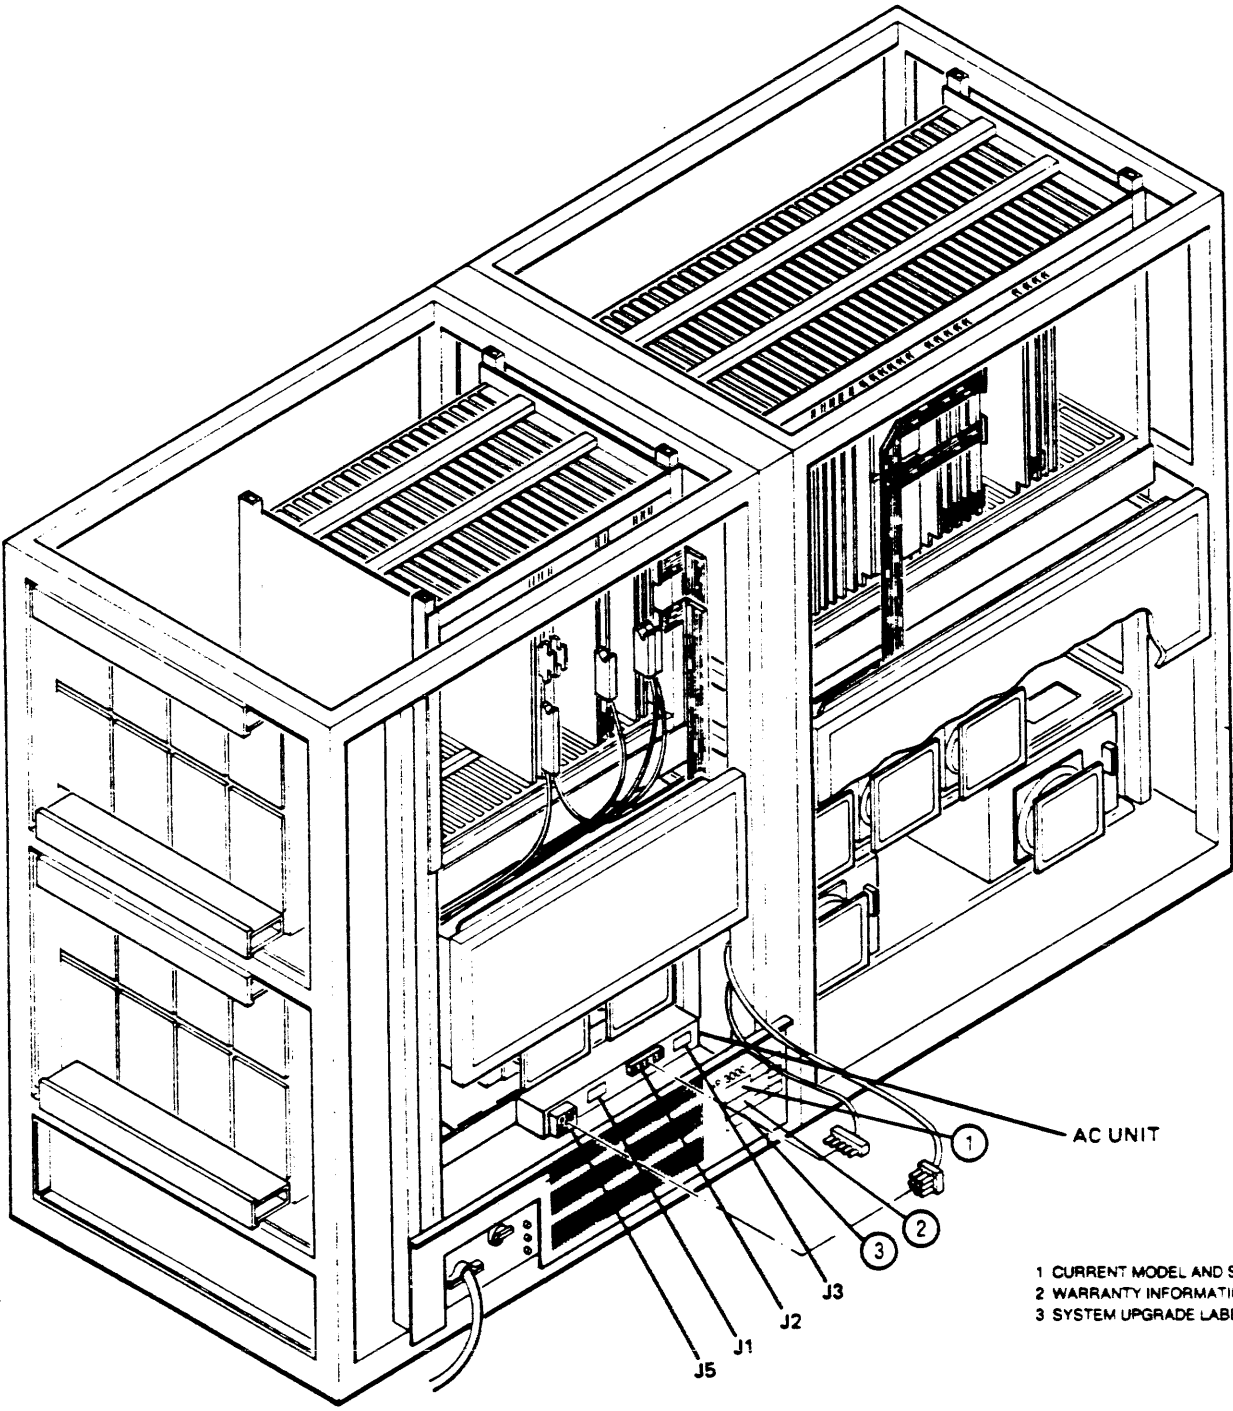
SPU Rear View (HP 32460B/32468B/32468C), Panels Removed.
